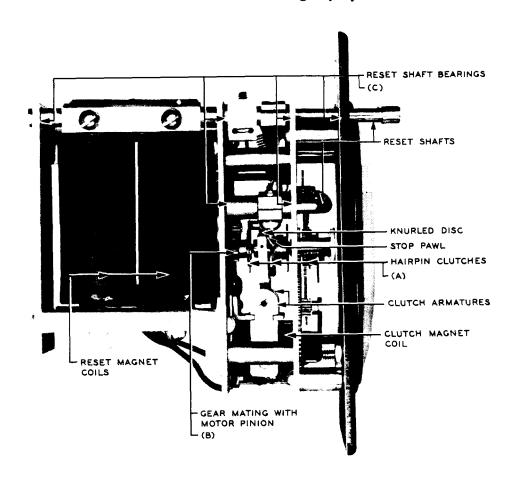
Timer Mechanism Having Clutch With Two Armatures - Side View
